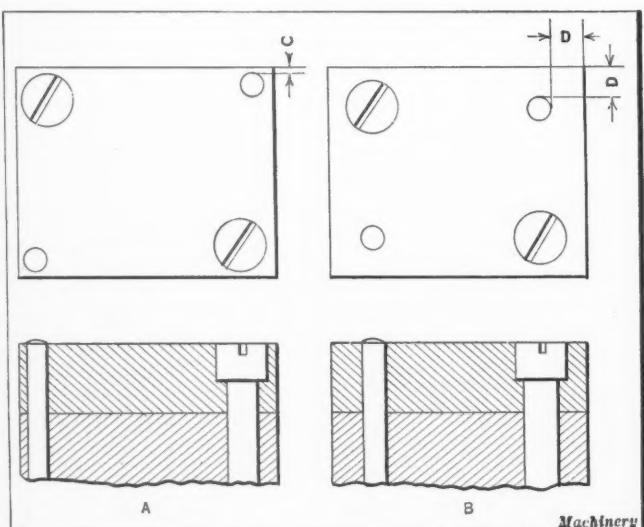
Diagrams showing how far Dowels should be located from the Edges of a Part
